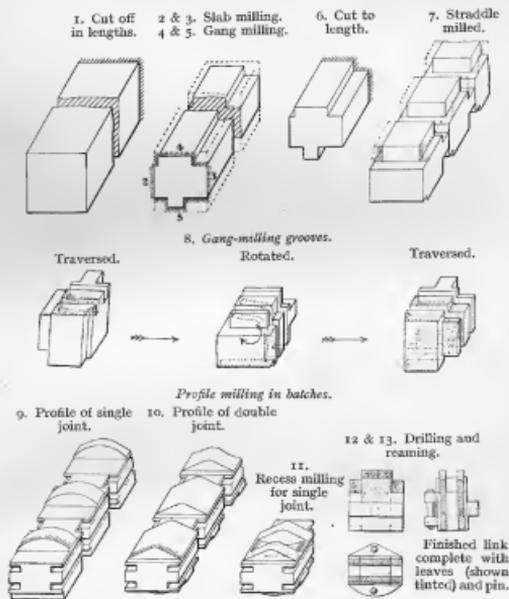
Wicks rotary typesetter; operations in machining chain-links. Scale: half size.
